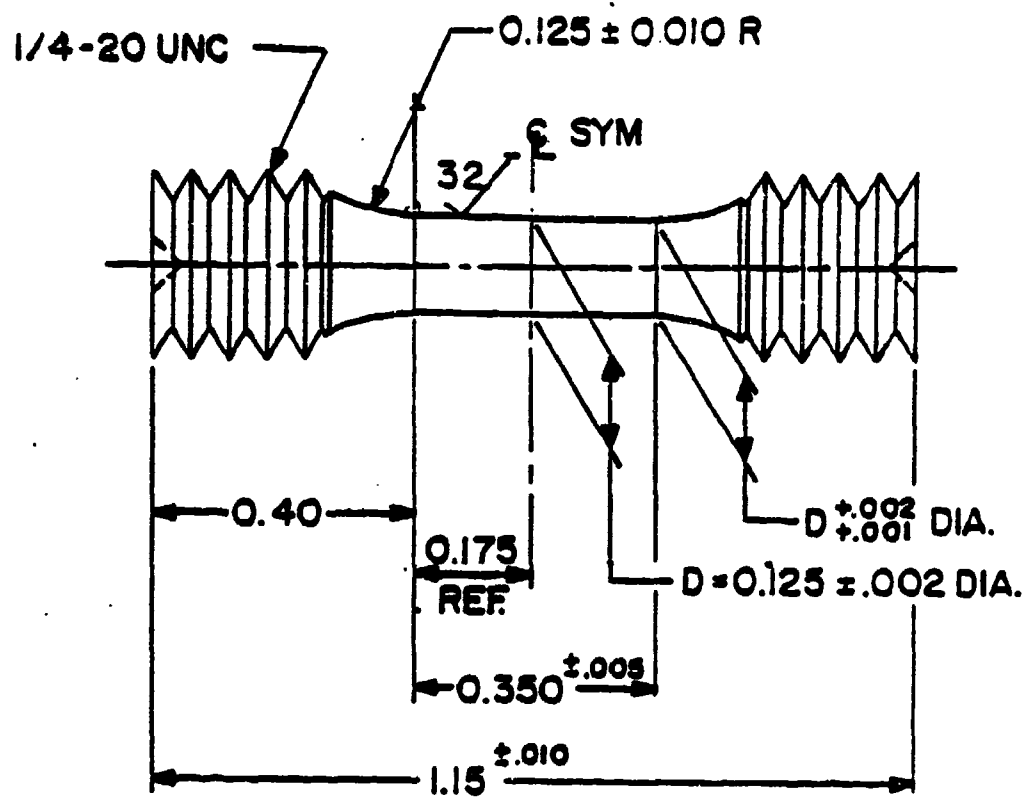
Hopkinson Bar Specimen Design (Dimensions in Inches).
